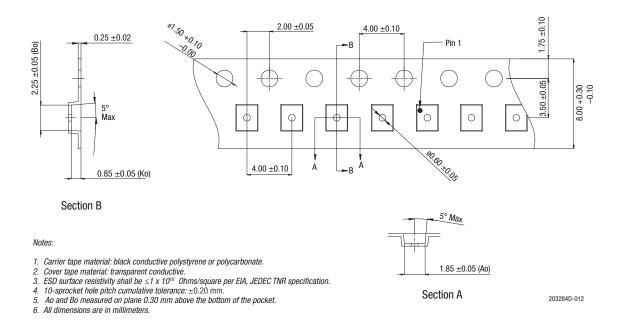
SKY13550-667LF Tape and Reel Dimensions
